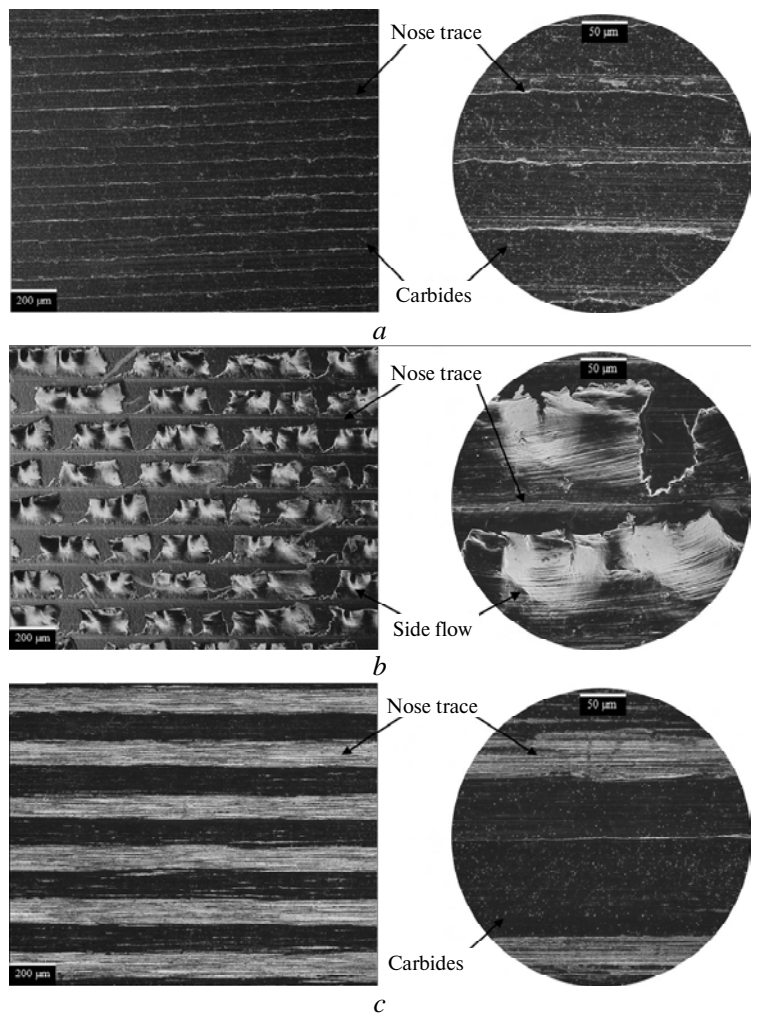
Conditions of material surface after machining with TiAlN-coated CBN 8120 wedges for feed values  $f_{1n} = 0.1$  mm/rev (a);  $f_{2n} = 0.2$  mm/rev (b);  $f_{3n} = 0.3$  mm/rev (c).
